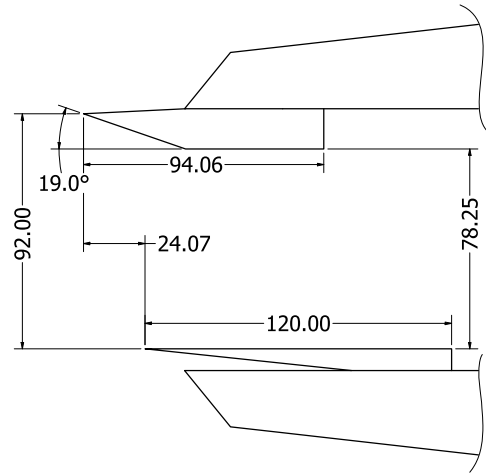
Wind tunnel model assembly sketch. The span-wise dimension of flat plate and shock generator is 276 mm.
